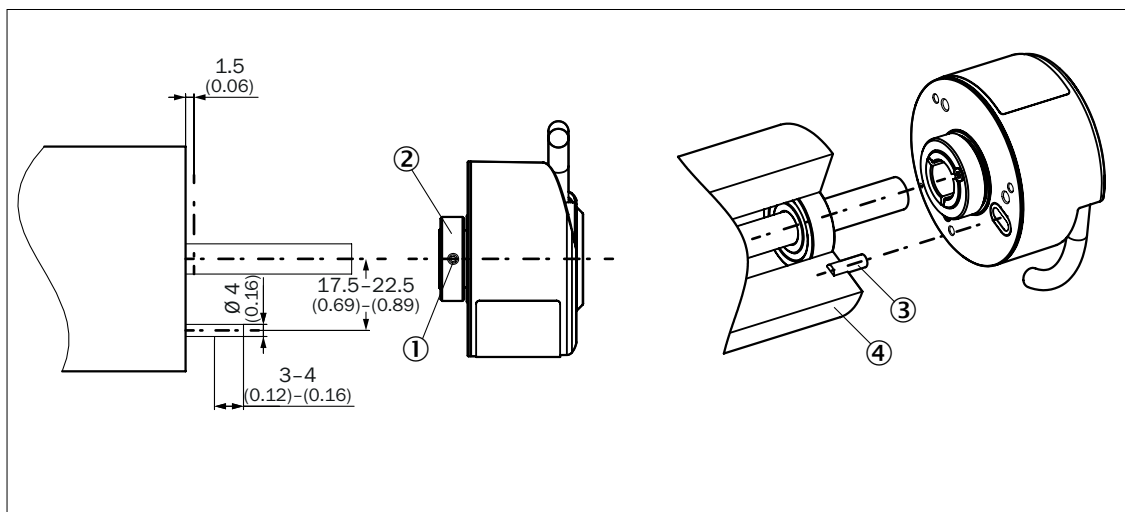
Mounting through hollow shaft with stator coupling O, B, D, E, G (clamping at the front)
